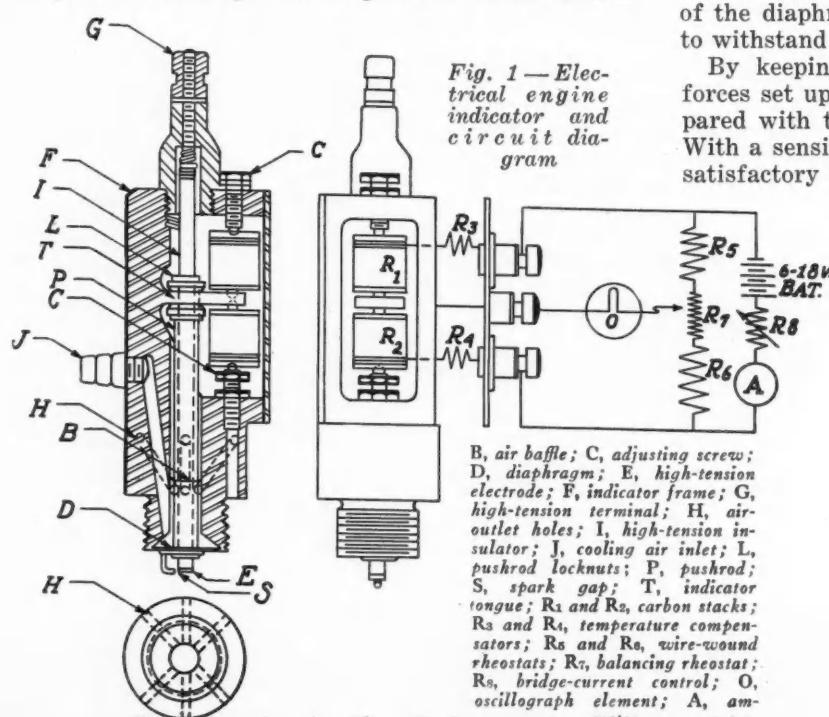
is a sketch of an indicator and the bridge circuit which it controls. The tongue *T* (cantilever spring) is machined integrally with the frame from a block of good spring steel which is carefully heat-treated after all machining except grinding is completed. By means of a hollow invar steel push rod *P*, the tongue is coupled to the thin steel diaphragm *D*, which is brazed to the end of the threaded adapter which forms part of the frame. This adapter is designed so that when screwed into the cylinder head the diaphragm is flush with the inner wall of the combustion chamber. The thickness of the diaphragm is not any greater than is necessary to withstand the pressures to be measured.
